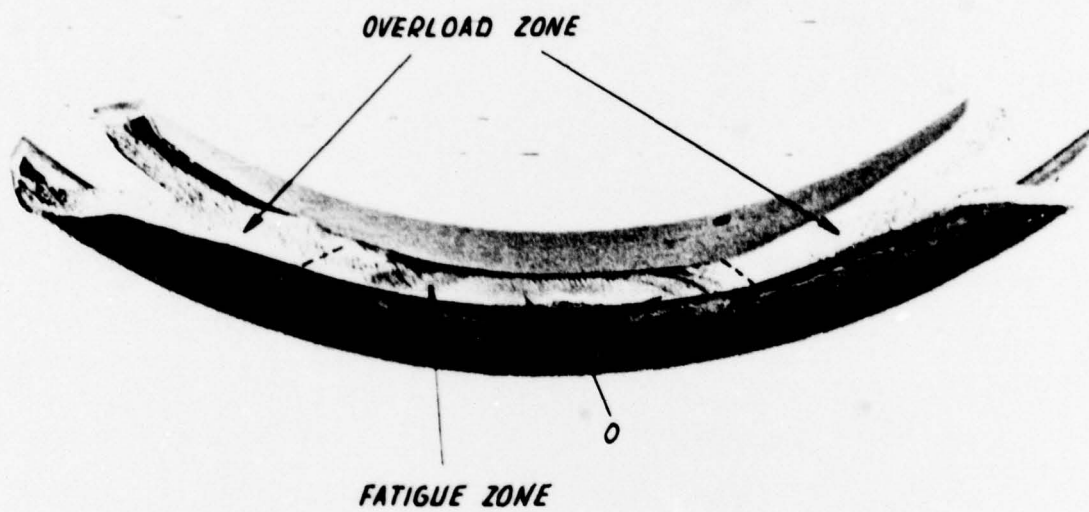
TYPICAL LANDING WHEEL FRACTURE SURFACE
